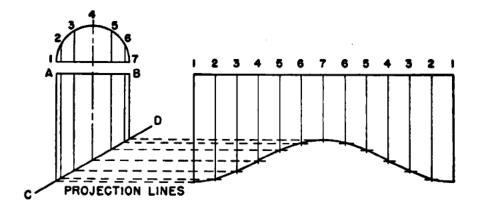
Transferring from elevation to stretch-out to make the pattern.
